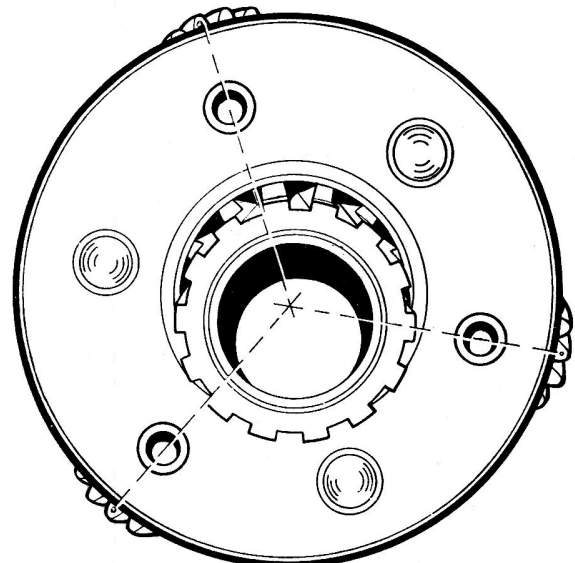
The marked teeth of the planet carrier gears must be positioned as shown for assembly
